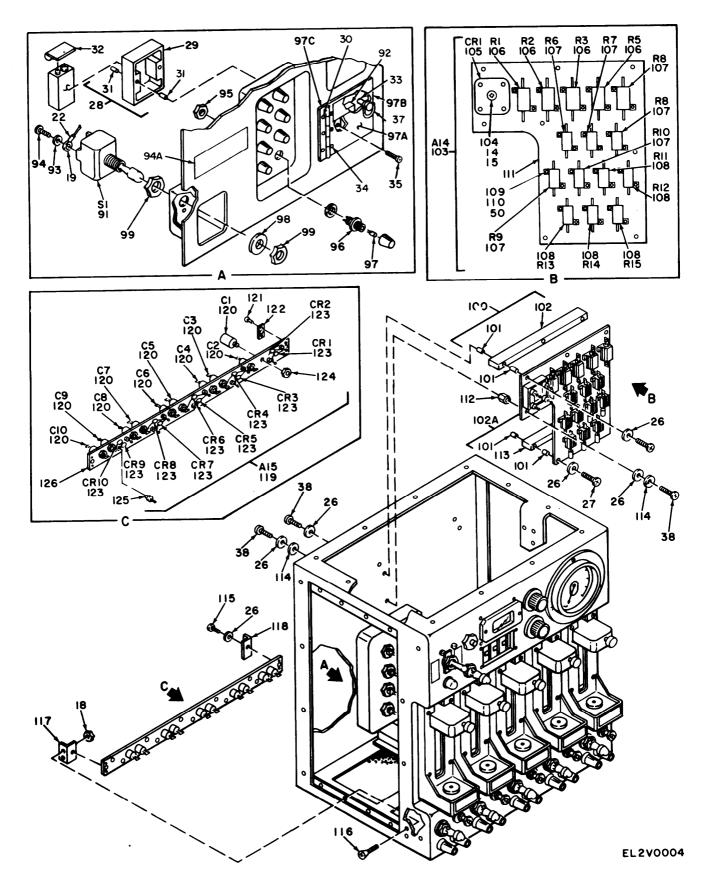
Battery Charger Assembly (Sheet 1 of 2).
